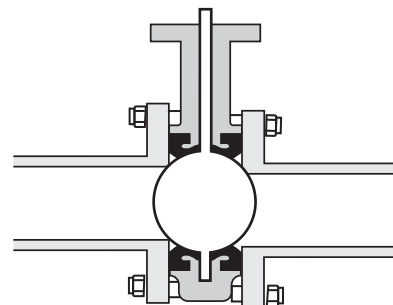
Final Valve Alignment & Tightening of Flange Bolts
